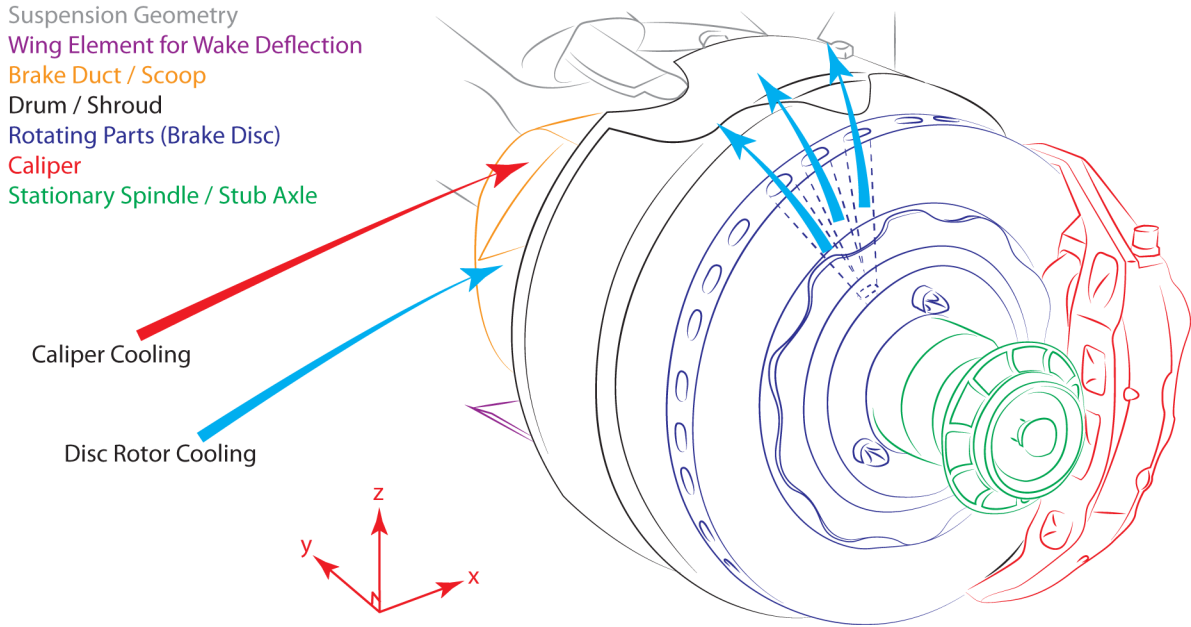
Line drawing of a typical front brake assembly highlighting the brake cooling channels and components of the hub.
